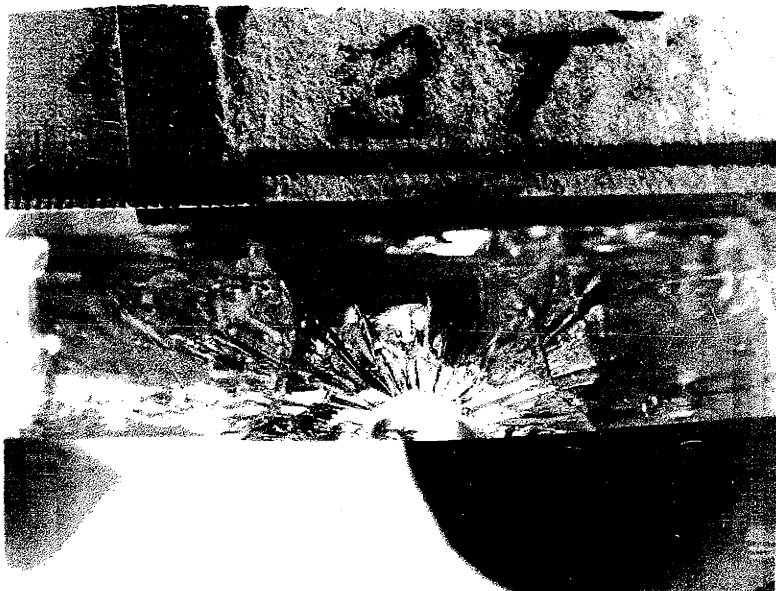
Typical Fracture Surface Morphology for Tempered Glass
